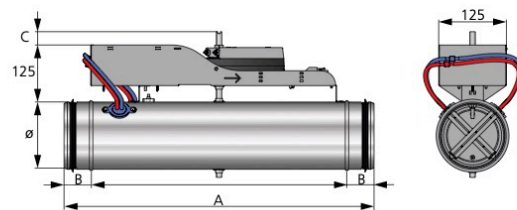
Dimensions, WISE Damper circular and WISE Damper circular with spring return.
